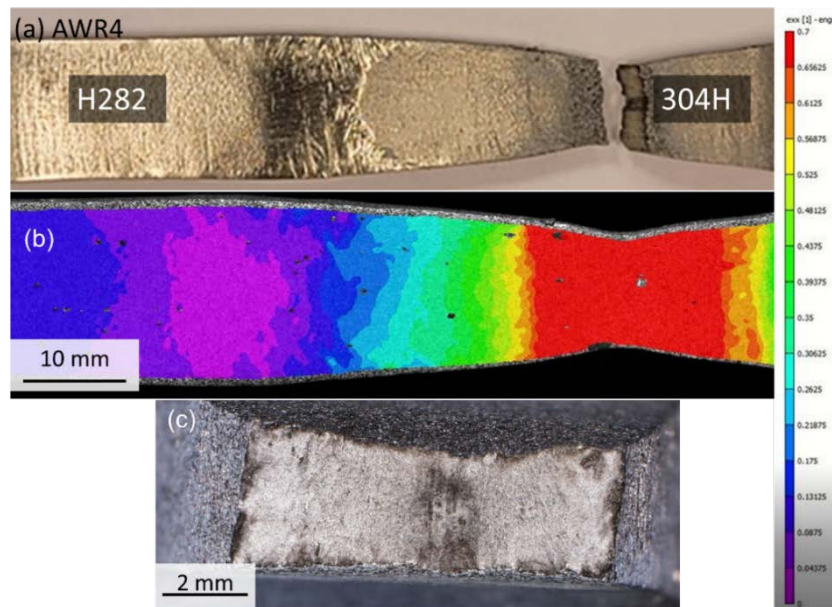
(a) Fracture location in fusion zone, (b) DIC engineering strain map, and (c) fracture surface of ductile 304H substrate in AW-RT sample (AWR4-32% strain to failure). AWR1 shows similar behavior.
